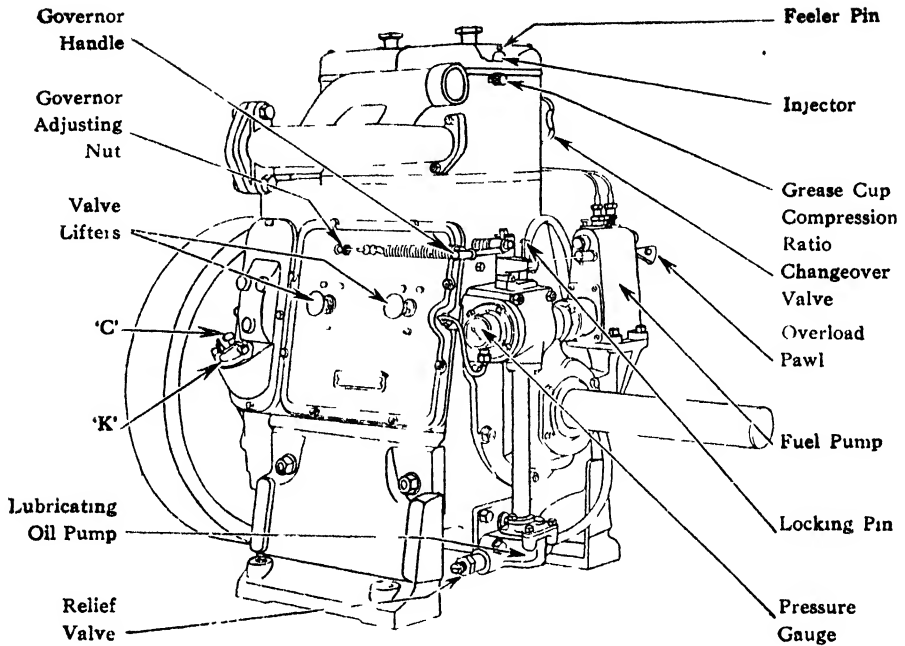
A TYPICAL SOLID INJECTION DIESEL ENGINE
